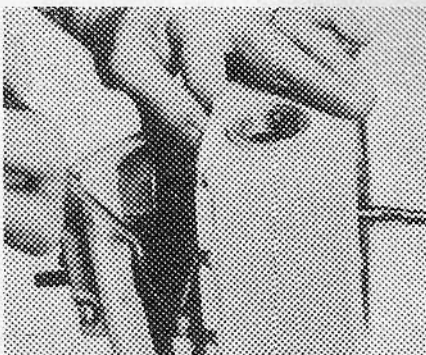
Chain lubricating oil line must be disconnected before removing the main bearing housing.
